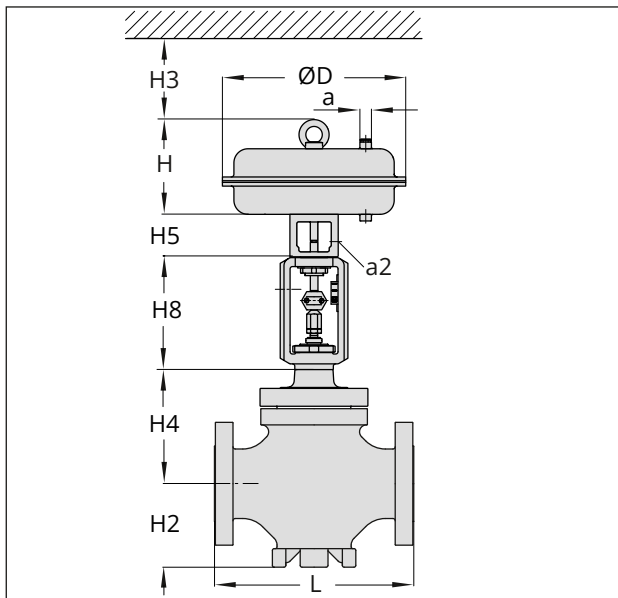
Type 3251-7/3251-AM-7 (Type 3251/3251-AM Valve with Type 3277 Pneumatic Actuator)
